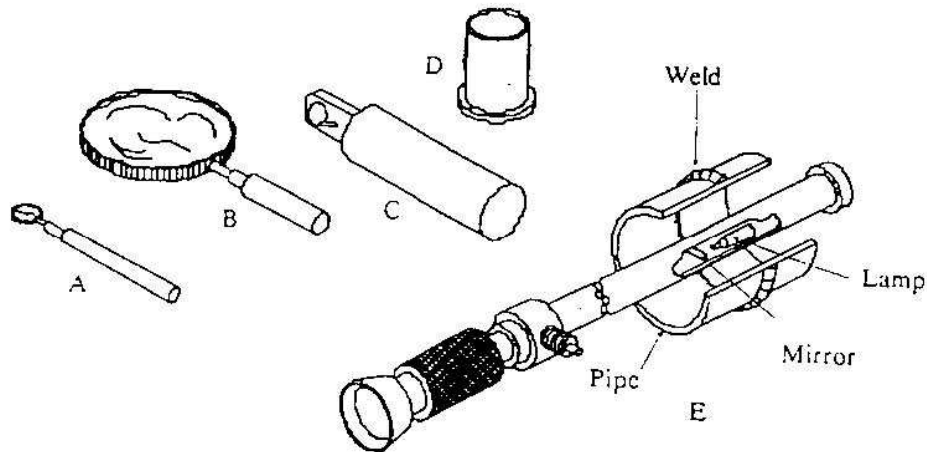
Various optical aids used in visual inspection. (a) Mirror on stem (b) Hand magnifying glass (c) Illuminated magnifier (d) Inspection glass (e) Borescope.
